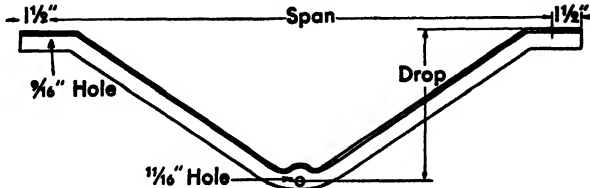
V-shaped angle-iron crossarm brace. (Courtesy Joslyn Mfg. and Supply Co.)
